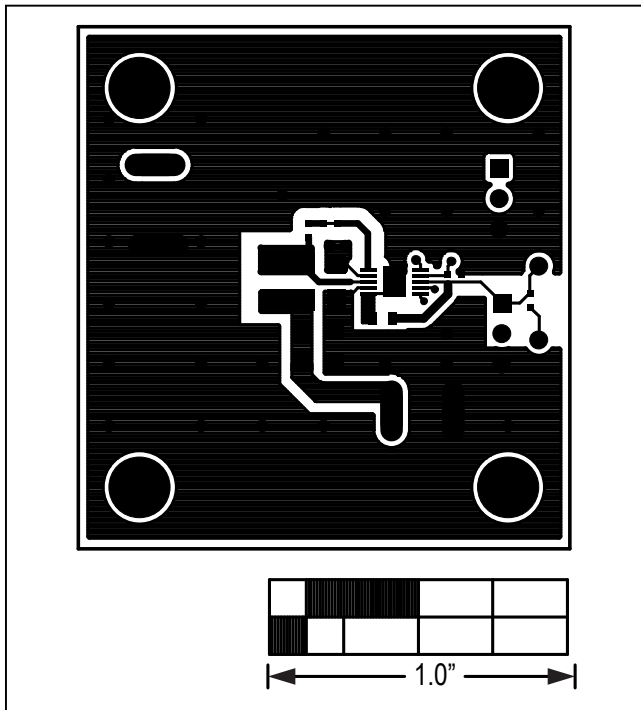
MAX16956 EV Kit PCB Layout—Component Side
